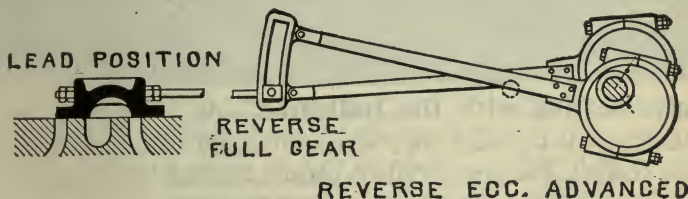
Setting the link motion: 4. *Locating the eccentrics—fourth step:* The reverse eccentric is advanced until the valve shows the proper lead; this moves the valve to its reverse linear advance position which completes the setting except when final adjustments are made to adopt the link motion to special running conditions.
